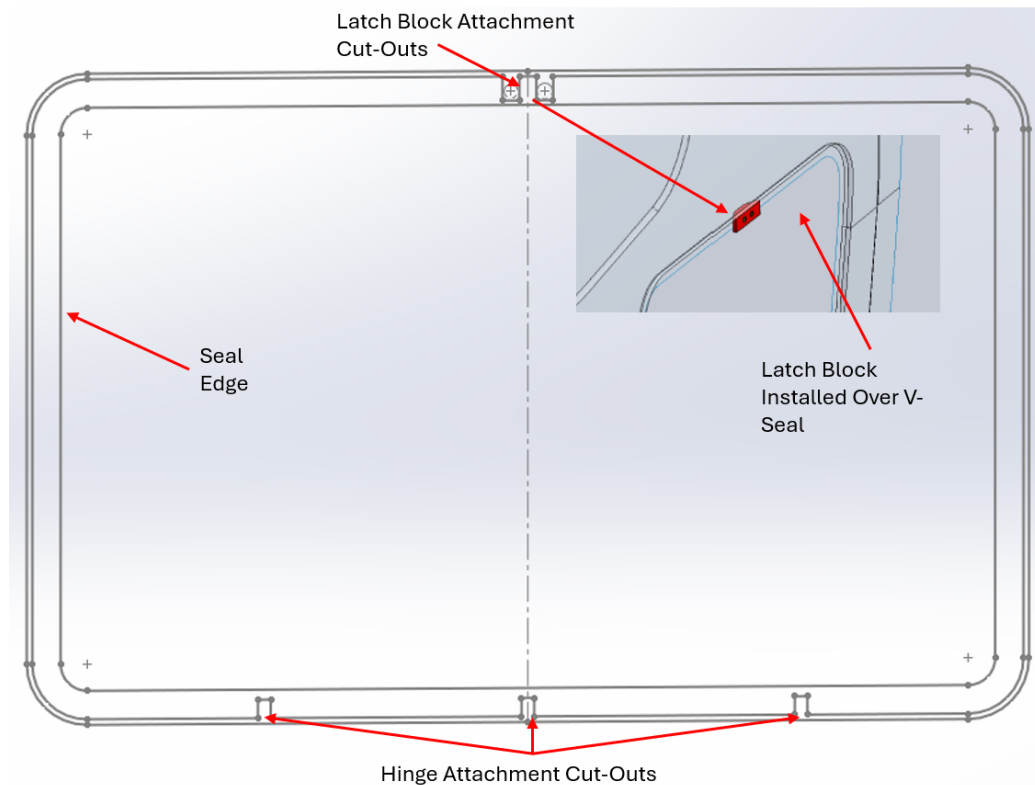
Luggage Door V-Seal Installation Showing Hardware Attachment Cut-Outs.
